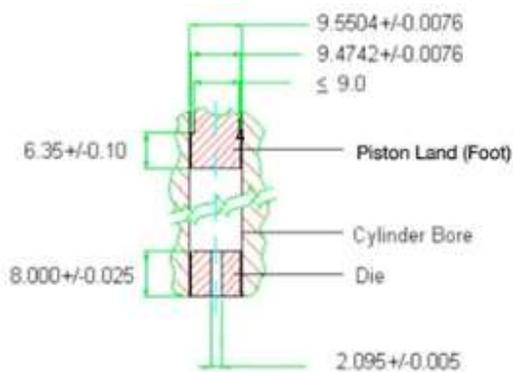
Dimensions of the cylinder bore, piston foot & standard die
